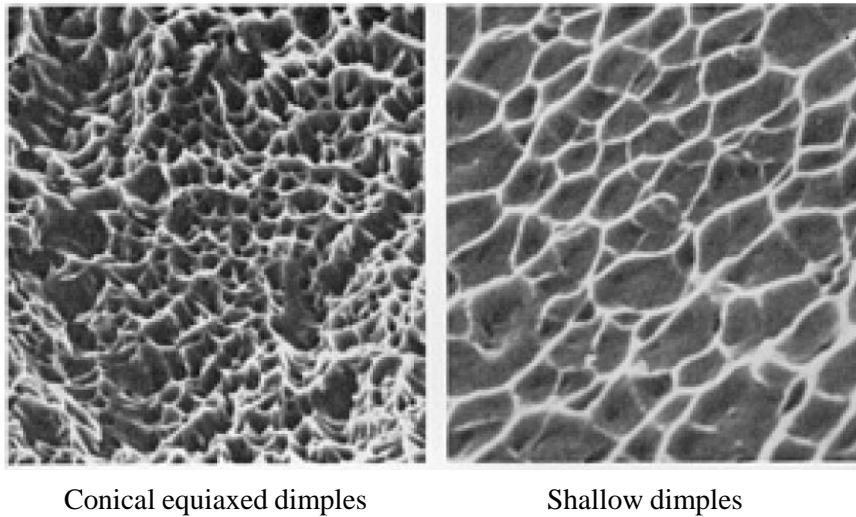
2 – Dimpled fracture surfaces, denoting ductile fracture [8].
